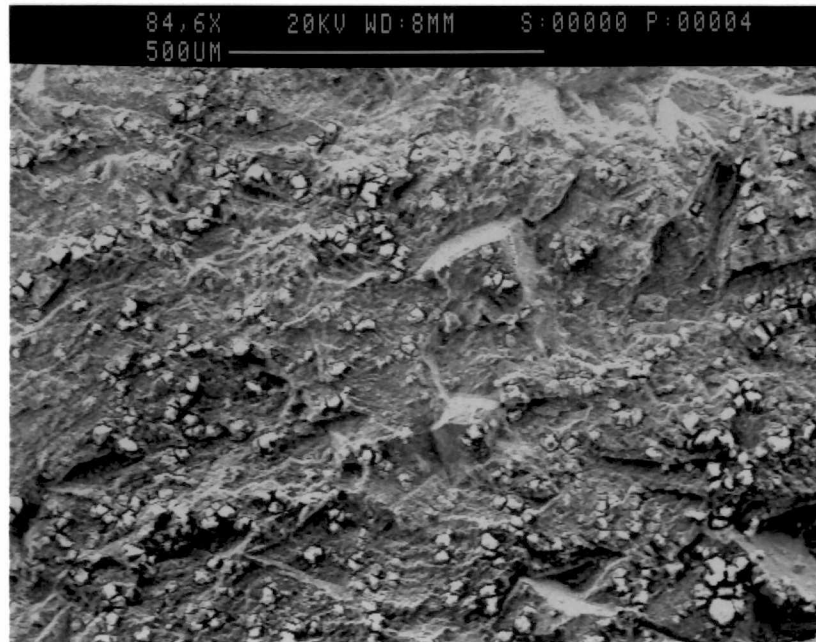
Fracture Surface of the Fatigue Crack in Figure 4.4-4 Showing
